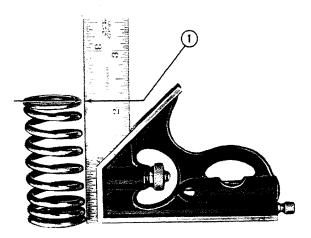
Checking Valve Spring Squareness 1. Not More Than 1/16" (1.59 mm)
